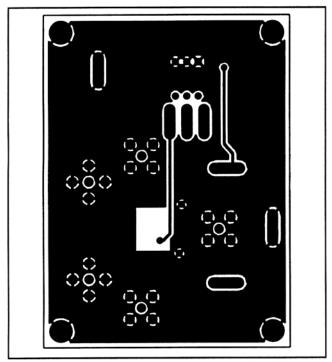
MAX4141 EV Kit PC Board Layout—Solder Side
